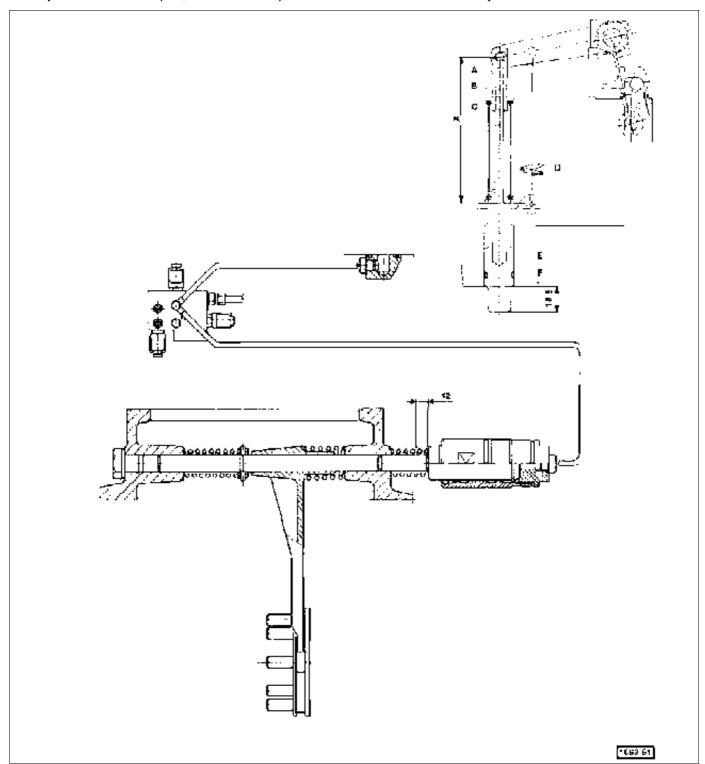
Front and rear differential lock control linkage for machines not equipped with SBA System.
